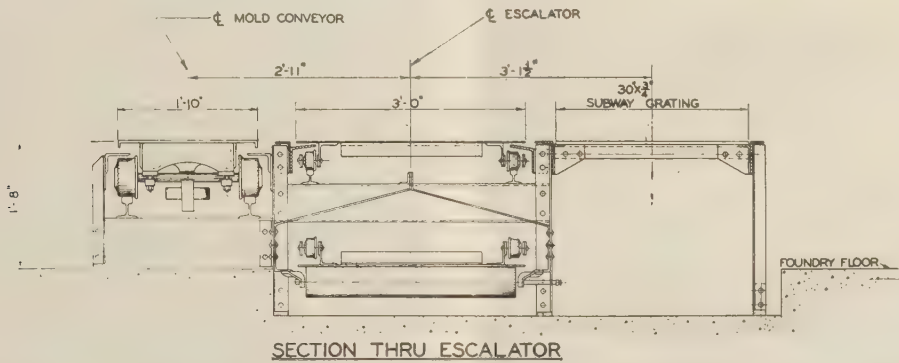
CROSS SECTION THROUGH MOLD CONVEYER AND POURING PLATFORM
